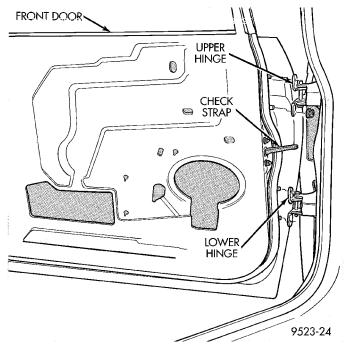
Front Door—Hinge Bolt Removal INSTALLATION
